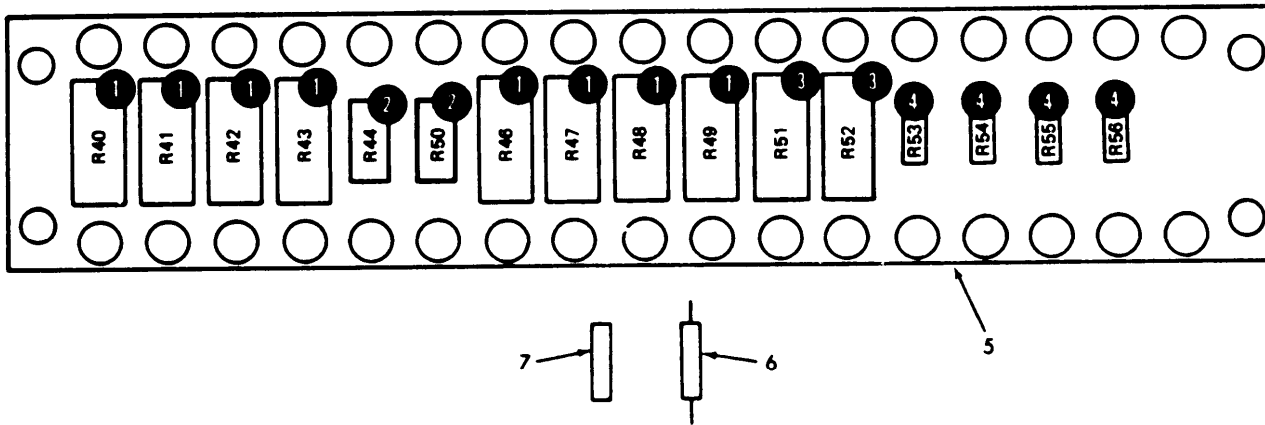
CIRCUIT CARD ASSEMBLY TB1 COMPONENT PARTS (ASSY P/N 12303122).
